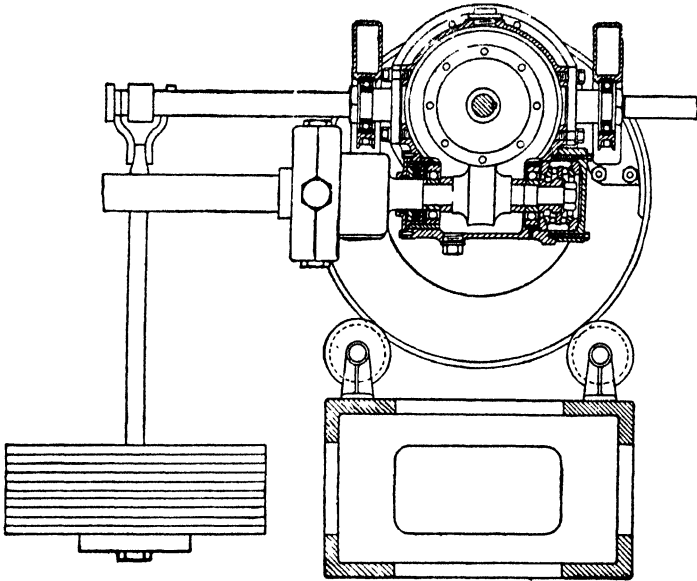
LANCHESTER TESTING MACHINE FOR WORM GEARS.
